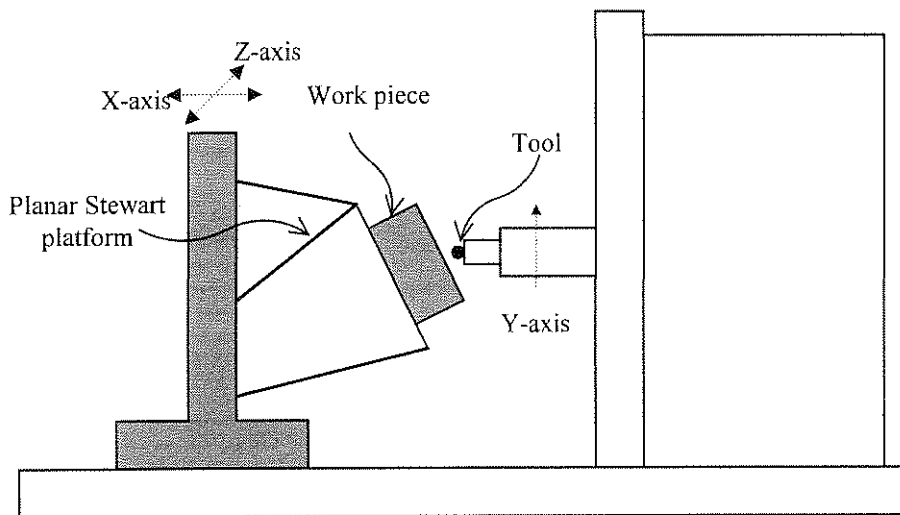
Side view of three-axis milling machine fitted with a planar Stewart platform.
